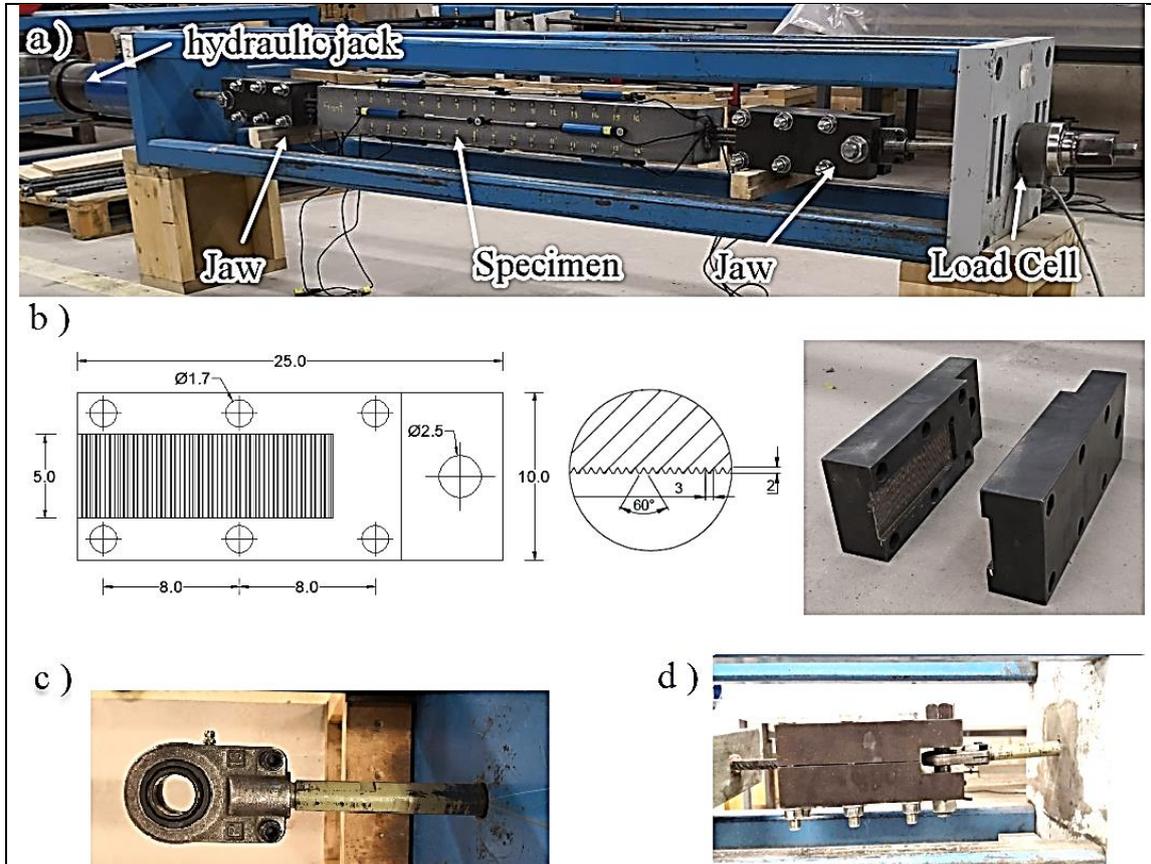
a) Tensile test equipment. b) Jaw details. c) rod end bearing. d) assembled Jaw connection.
